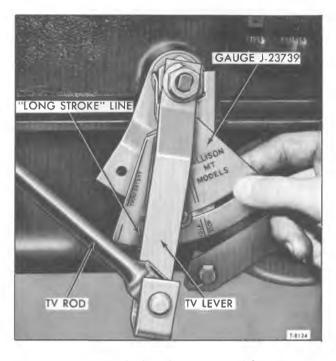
Checking for Proper TV Linkage Adjustment at Full Throttle
